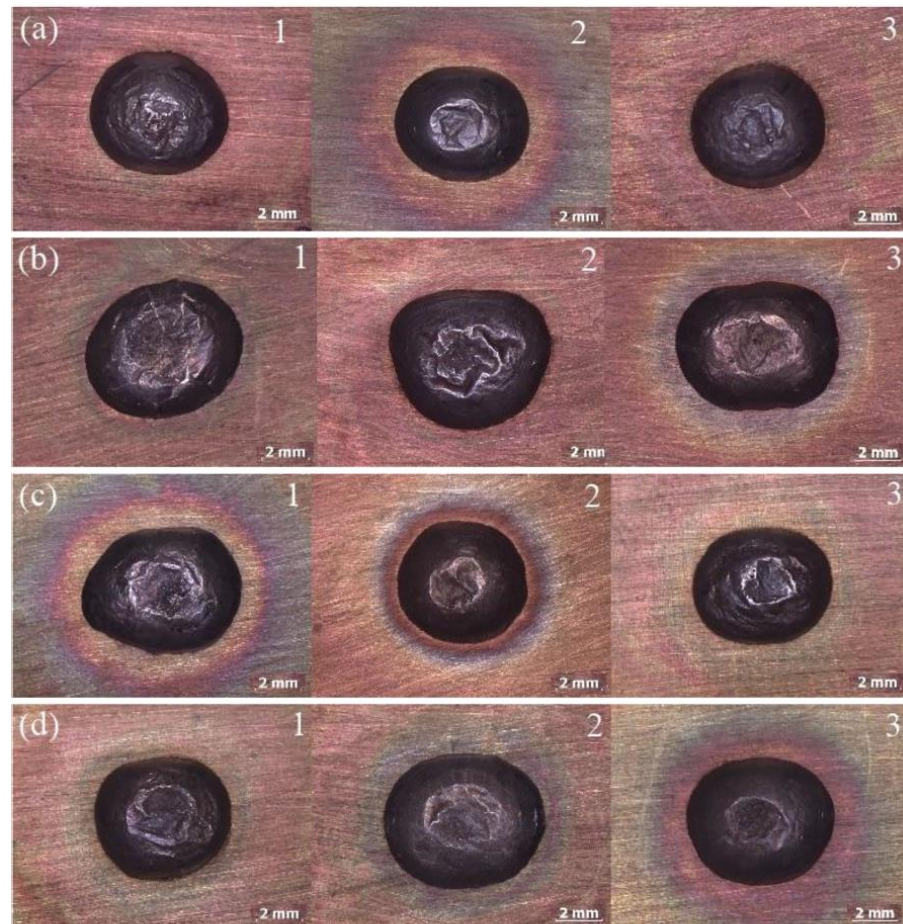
Photographs of solder alloy samples after the spreading test show a SAC105/Cu, b SAC105-0.5Te/Cu, c SAC105-1.0Te/Cu, and d SAC105-1.5Te/Cu
